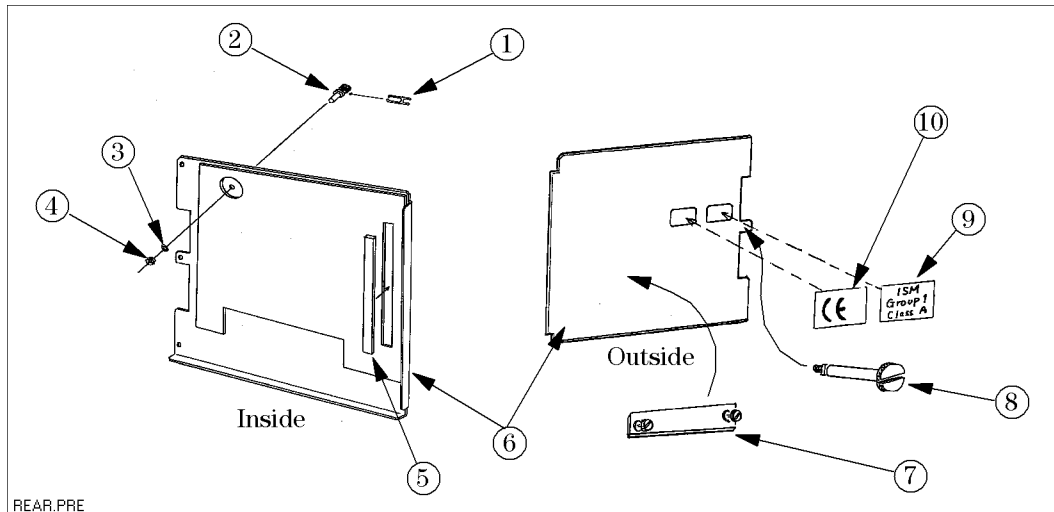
HP 4155B/4156B Rear Panel Parts Location
